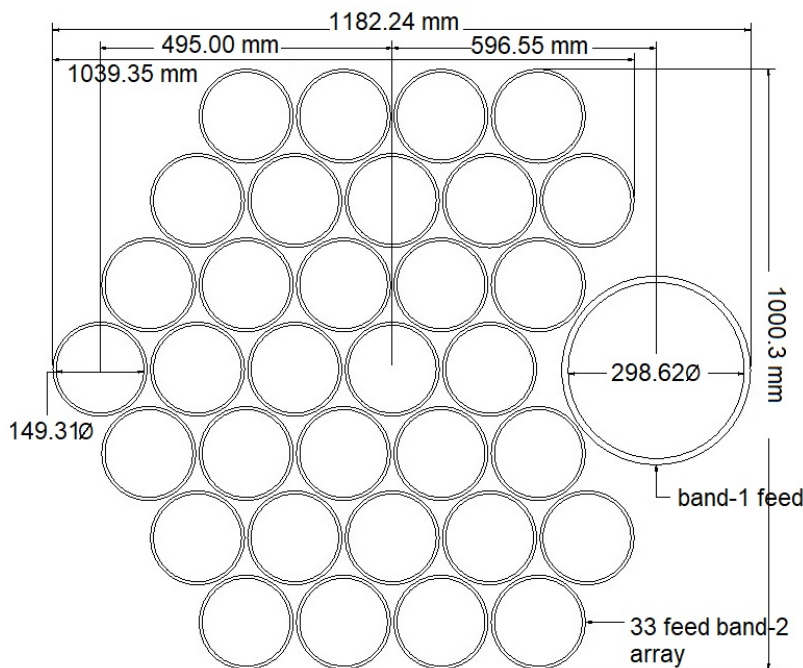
Possible array configuration using the measurements of the feed horns designed in this chapter.
